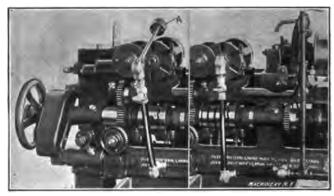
No.00 Brown & Sharpe Automatic Screw Machine equipped with Oil-pumping Attachment for Turret Tools
